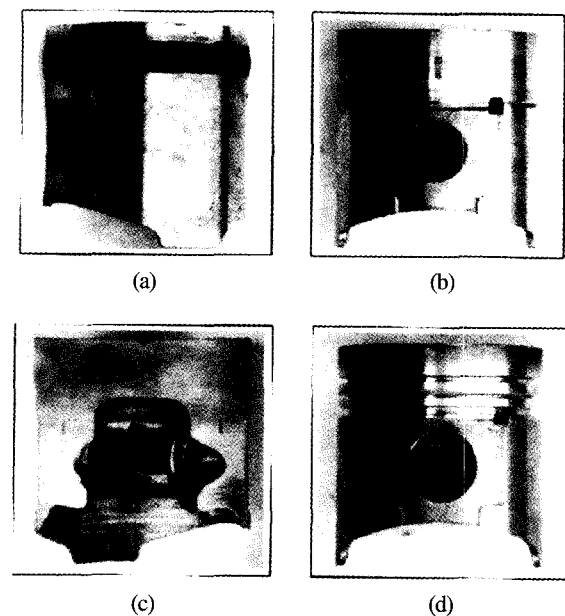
Photographs showing (a) bead appearance of the piston in as-fabricated condition, (b) after rough machining, (c) macrostructure of the cross-section, and (d) piston appearance of final machining
